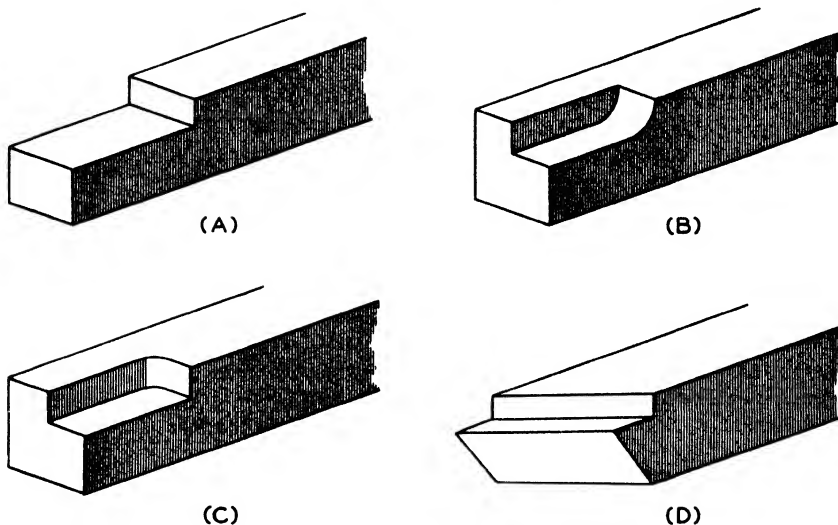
The Rabbet Recess (A); a Recess Milled to Give Side Support (B); a Recess That Gives Support against Both Side and End Thrust (C); and a Recess That Gives Support against End Thrust Only (D)
